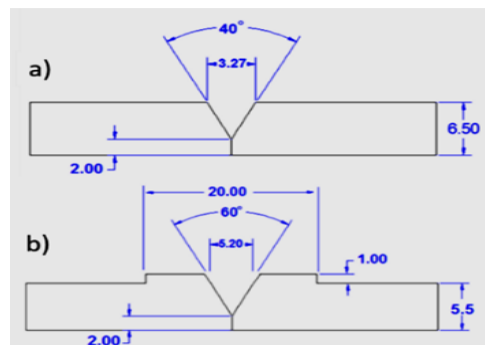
, V groove design, with 2 mm root face, and no root gap for, a) Specimen 1, 40° groove angle, and b) Specimen 2, 60° groove angle, 1 mm raised face
